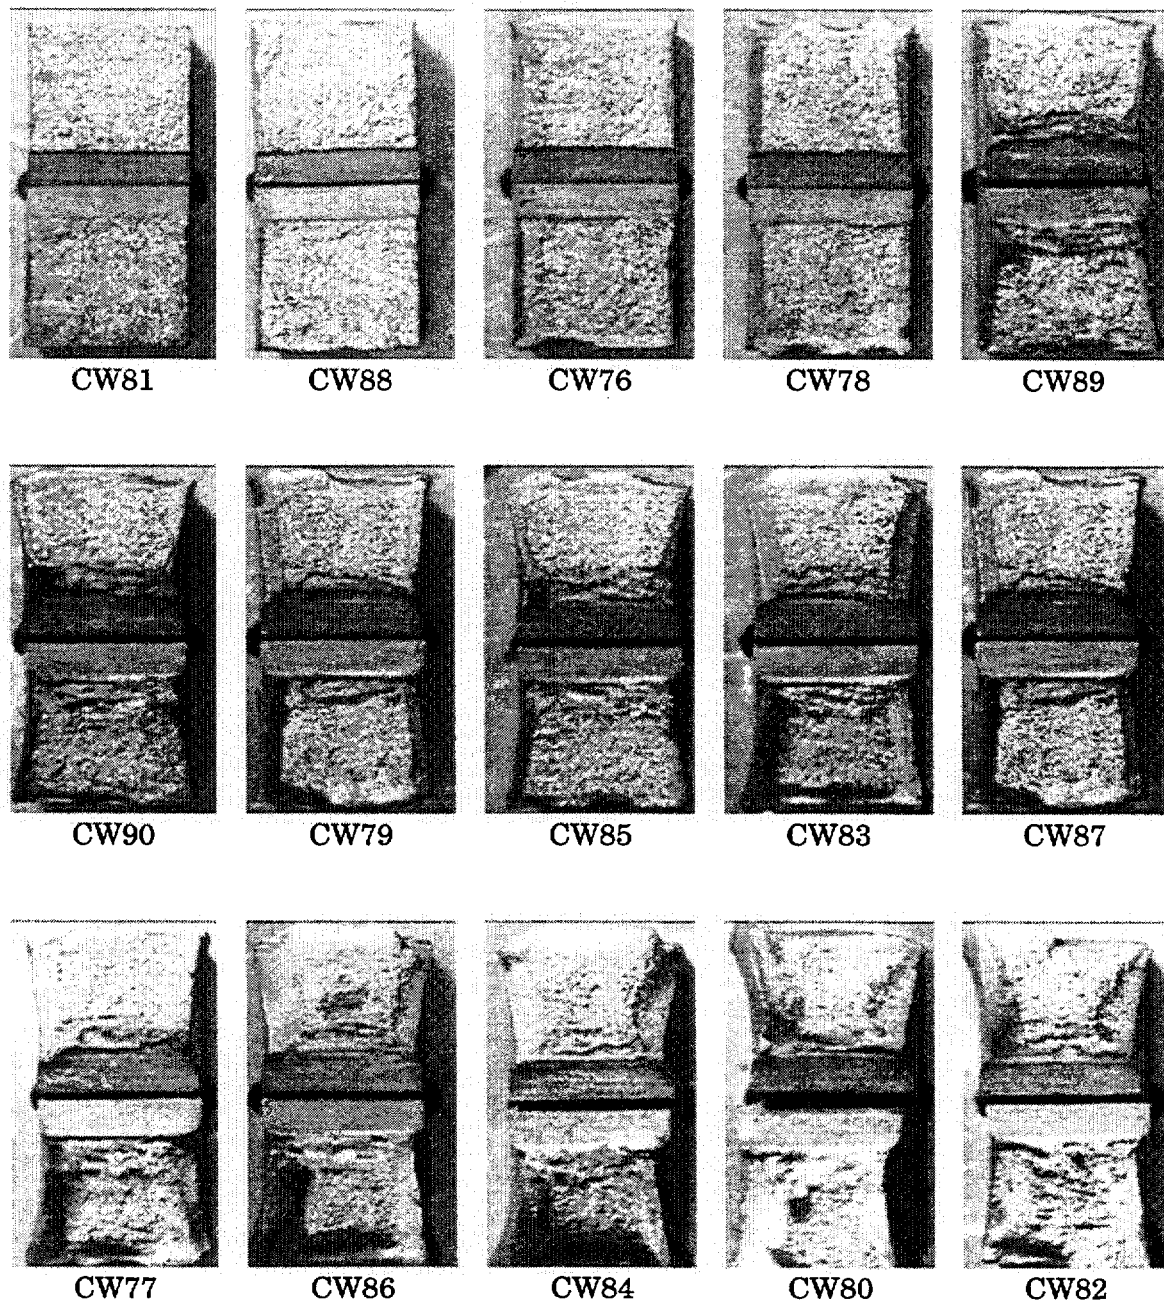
Charpy Impact Specimen Fracture Surfaces for J. M. Farley Unit 2 Reactor Vessel Weld Metal
